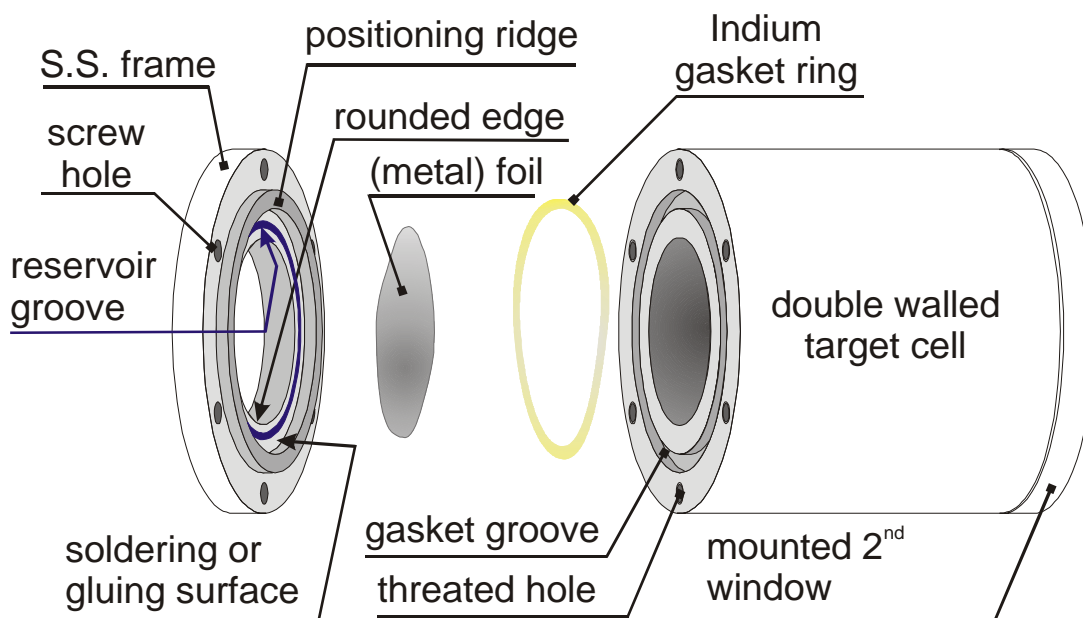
Drawing of the window assembly of one chamber of the gas cell target
